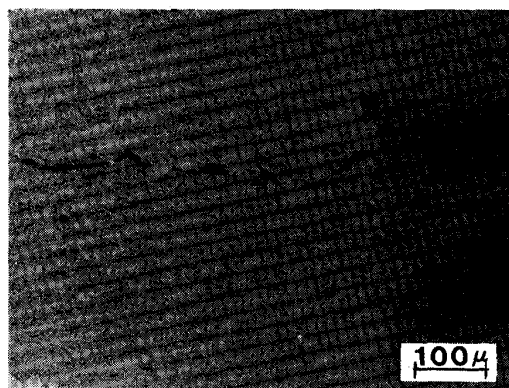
Cross sectional view of defect detected by UST in flash welded zone.
